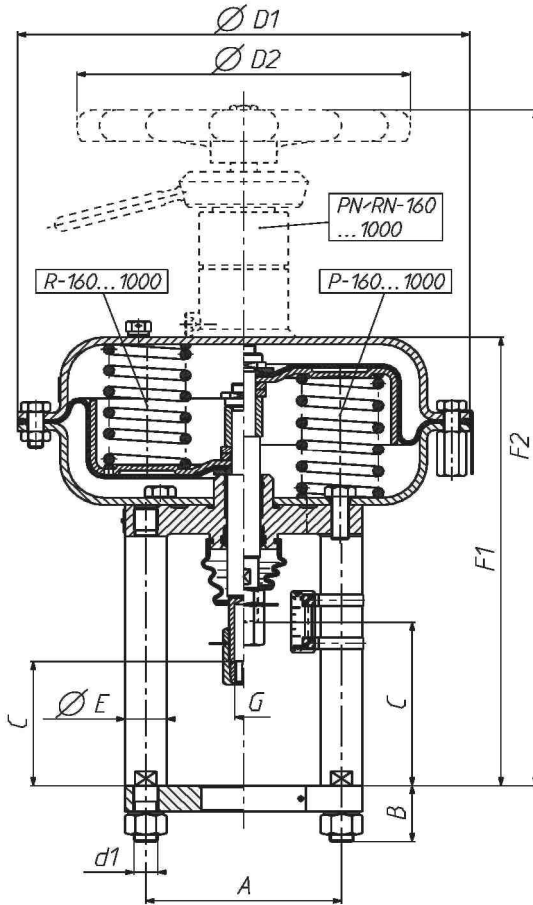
Type P/R pneumatic actuator connection dimensions Table 4. Type P/R-160...1000 actuator weight and dimensions
